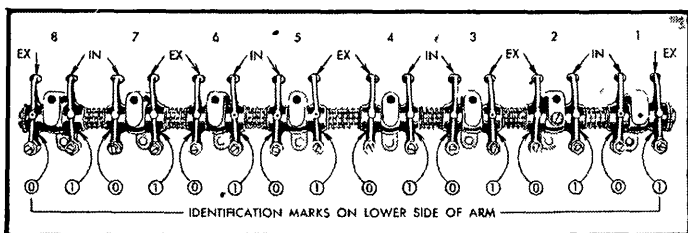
Rocker arm assembly, 1946-52 Series 40, 50
